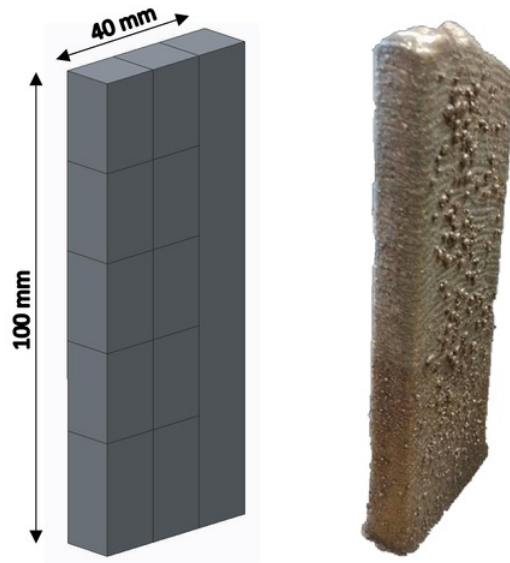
CAD diagram input into the machine (LEFT) with the 3D printed Output (RIGHT)
